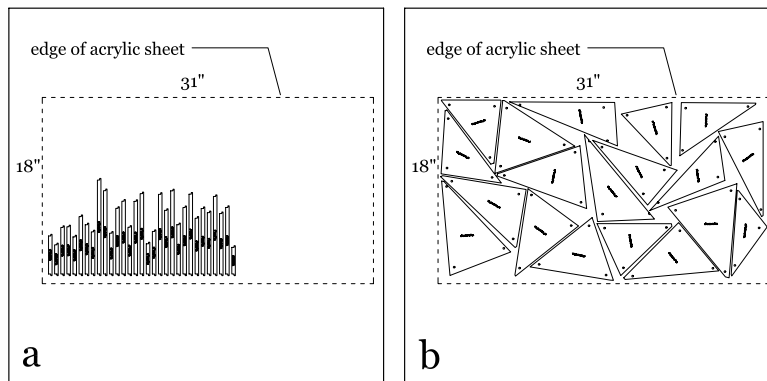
(a) file for laser cutting member (b) file for laser cutting glass panels
